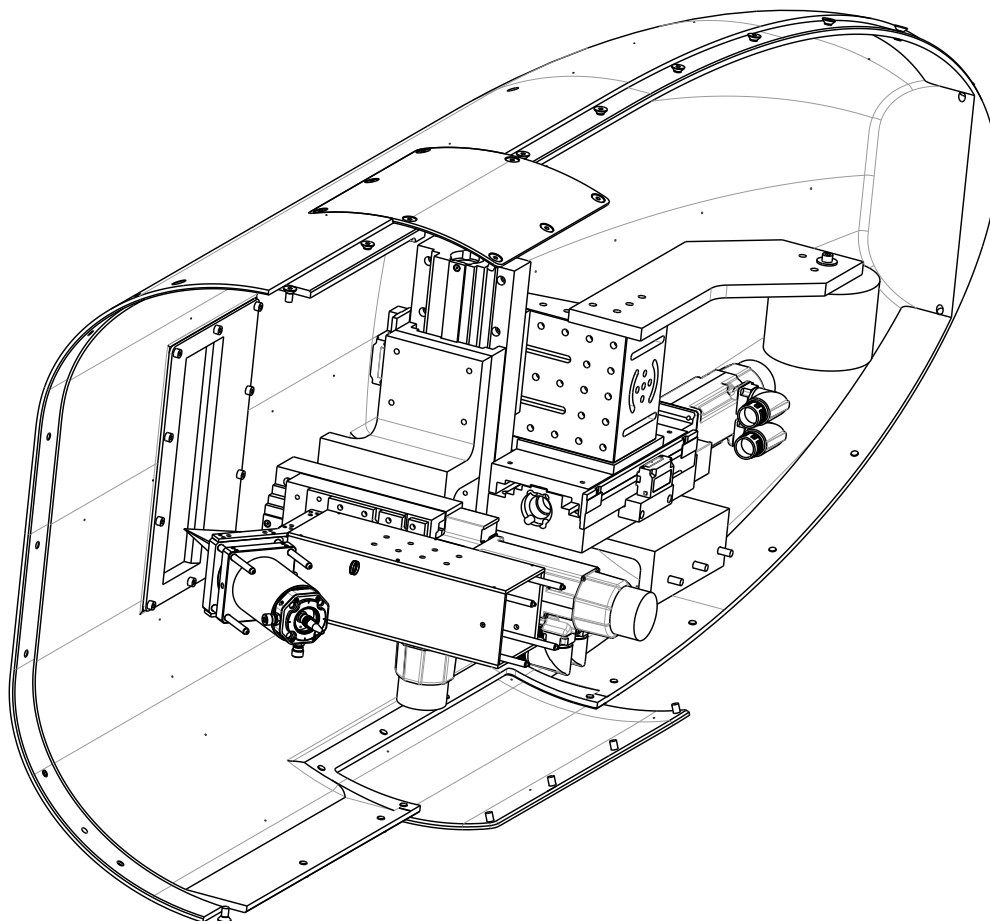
Port side of fuselage nose section with LDV/traverse assembly.
